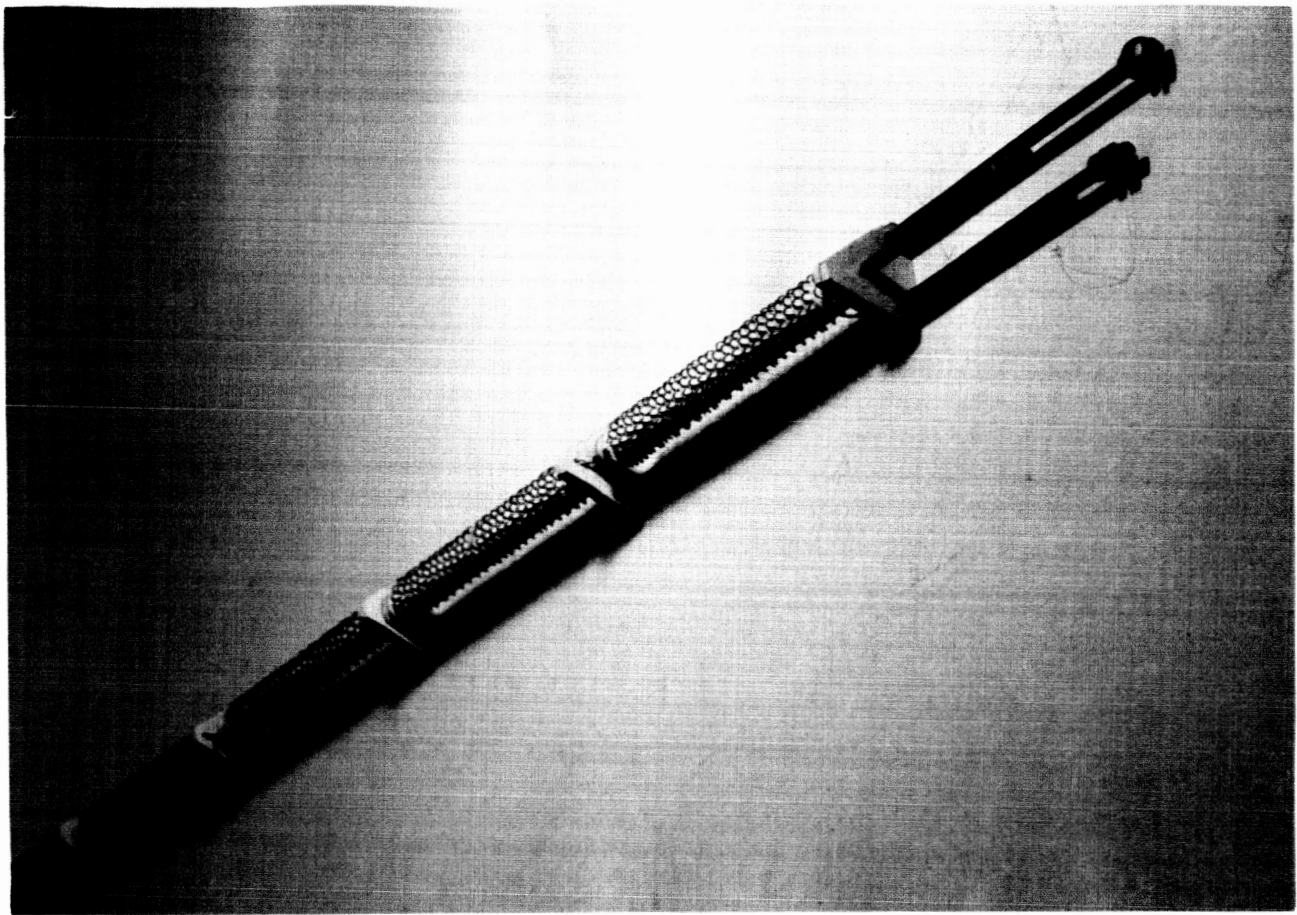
HOT GAS HEATER ASSEMBLY
